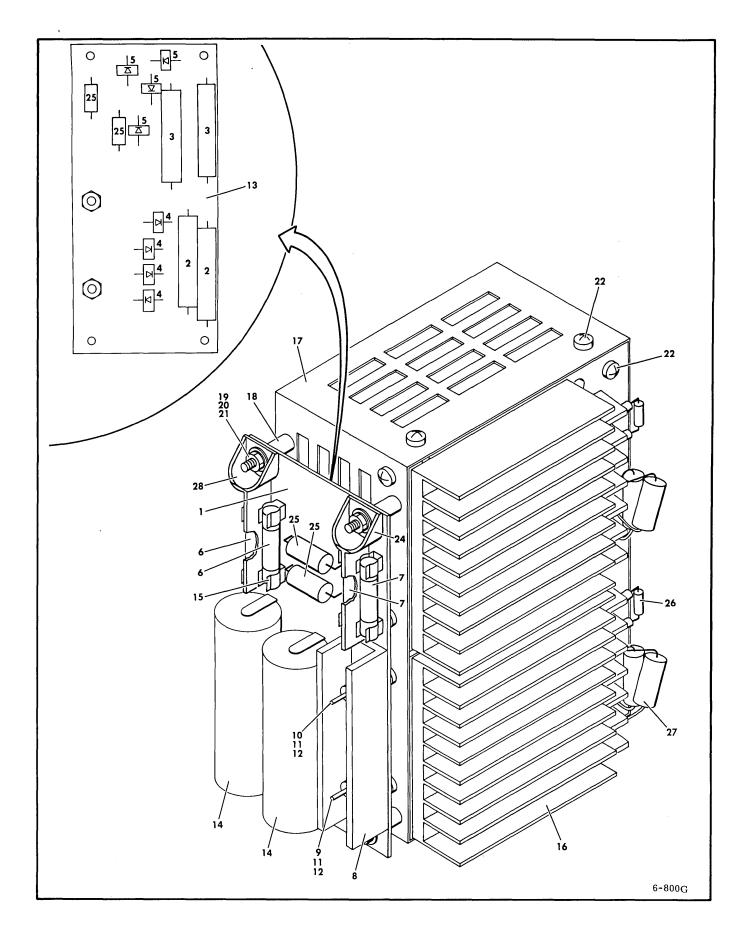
STORAGE MODULE PS ASSEMBLY KIT (USE S/C 23 AND BELOW)
